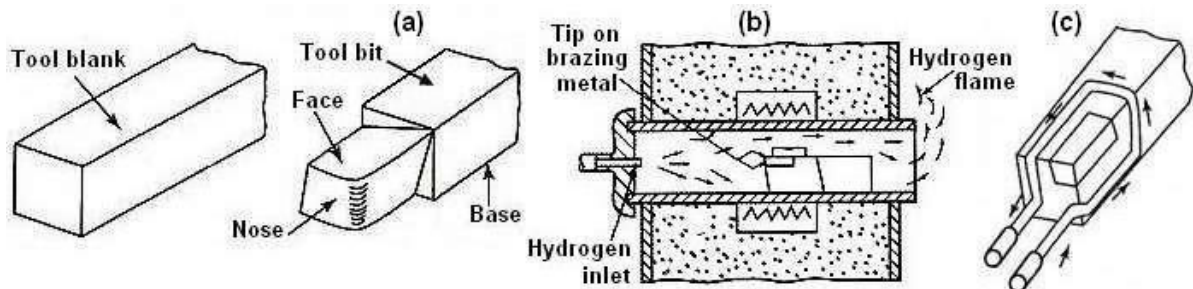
(a) Forged tool (b) Furnace bracing of a tool tip (c) Induction brazing of a tool tip
